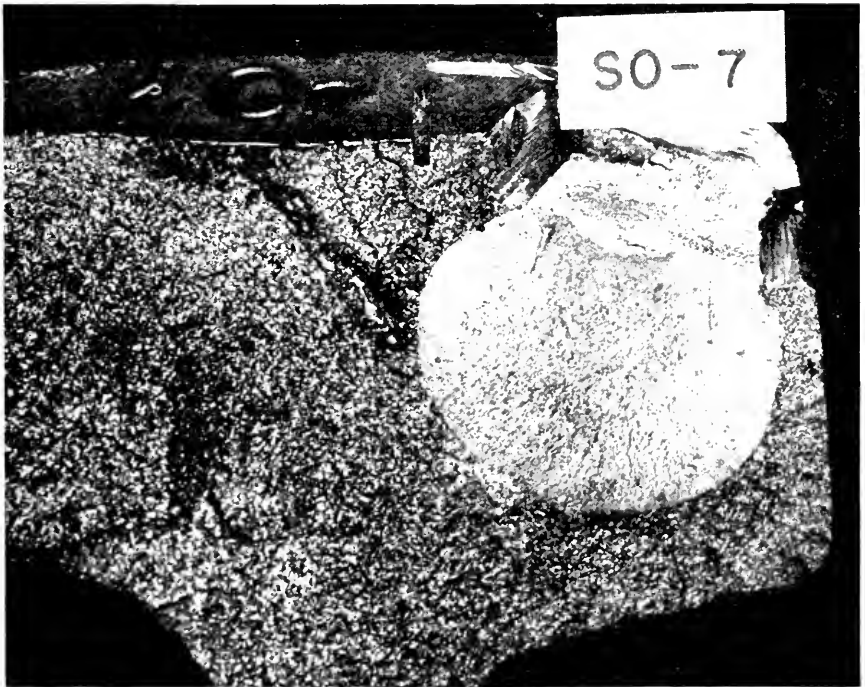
Deep-Etched Cross Sections Through Detailed Fracture Specimens.
